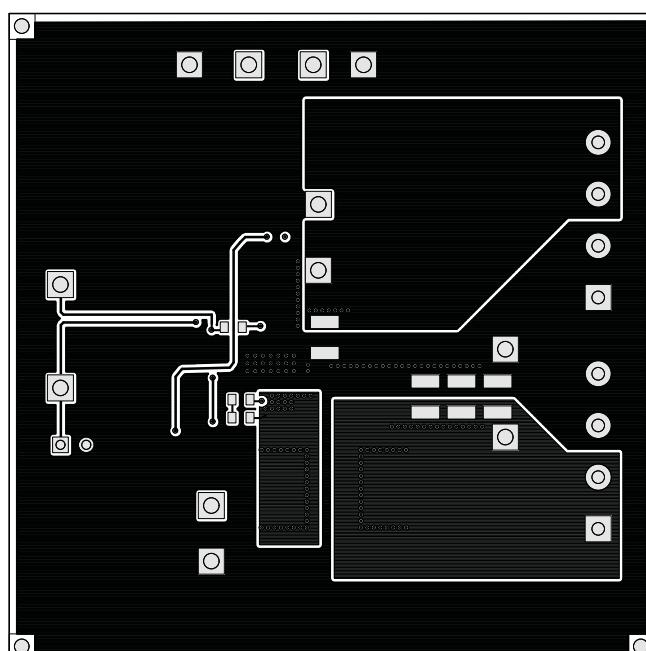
TPS56121EVM-601 Bottom Copper (Top View)
